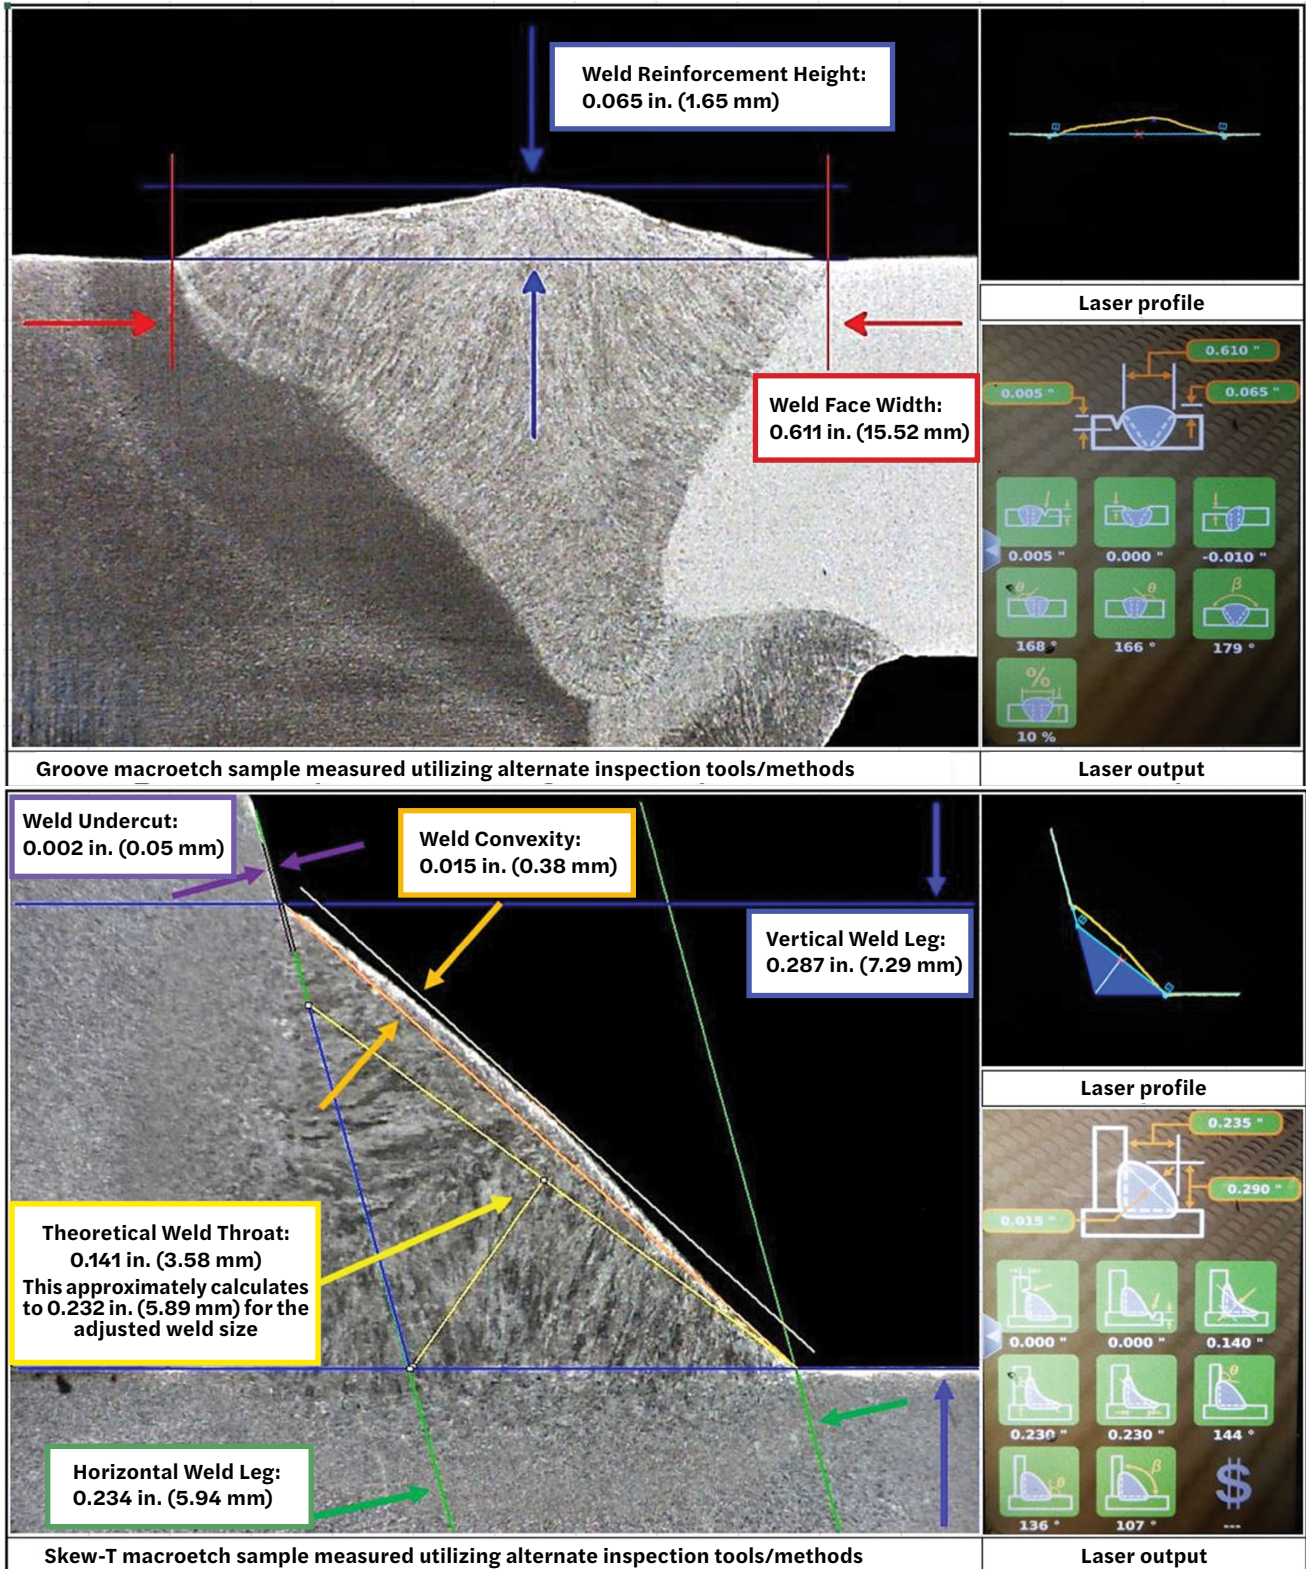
Comparison testing of groove and skewed T-joint welds.
